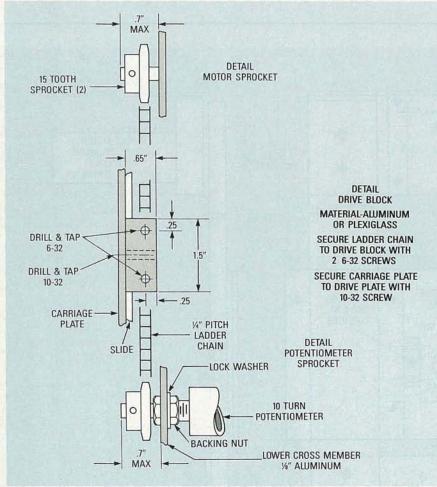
THIS DETAIL DRAWING shows the ladder-chain drive system.
